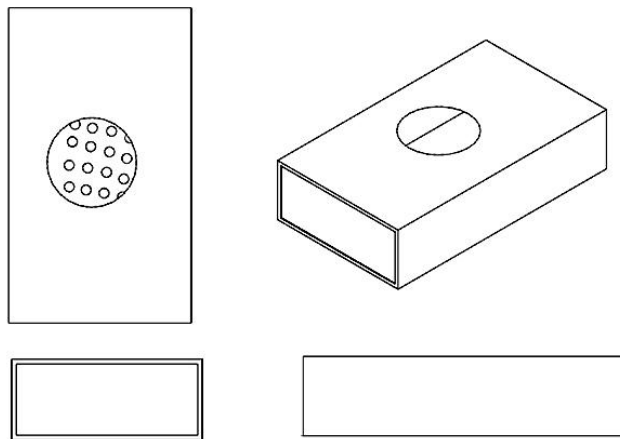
Top, front, side, and isometric view of the chassis where the components of the prototype will be placed.
